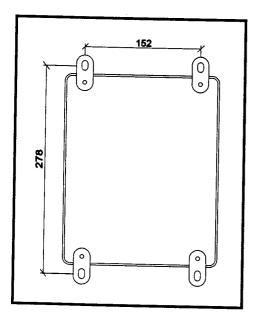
Mounting Arrangement Using Supplied Mounting Kit
